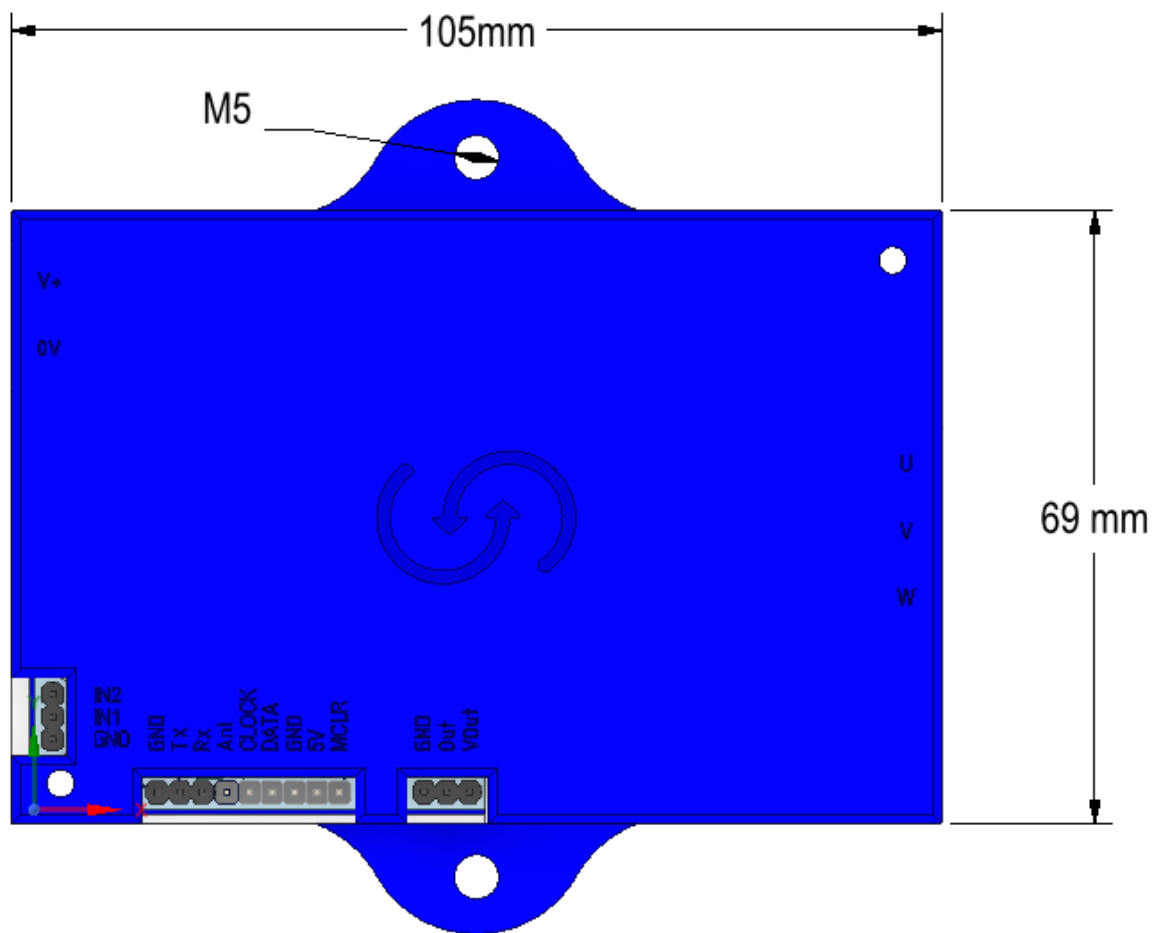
ZIKODRIVE 2 Top View (With Casing)
